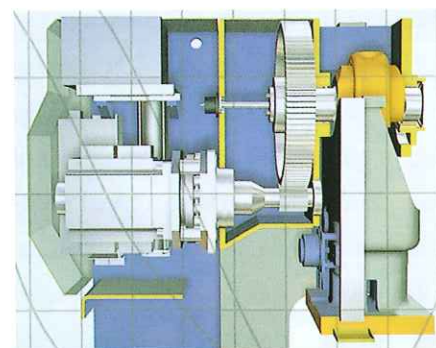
Basic structure of Crank shaft direct drive system (gear connection system)
